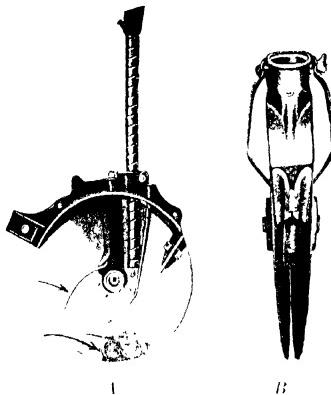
Double disc.—A, Inside view.; B, rear view.
